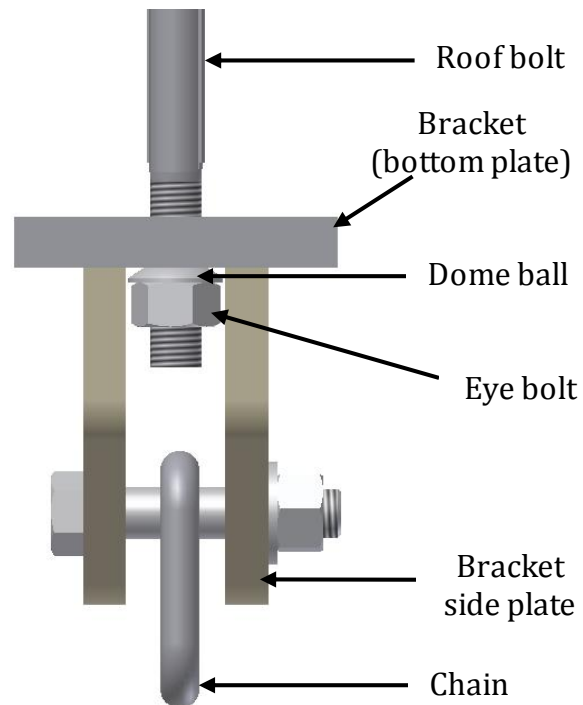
Details of roof bolt and bracket (Scharf, 2007)
